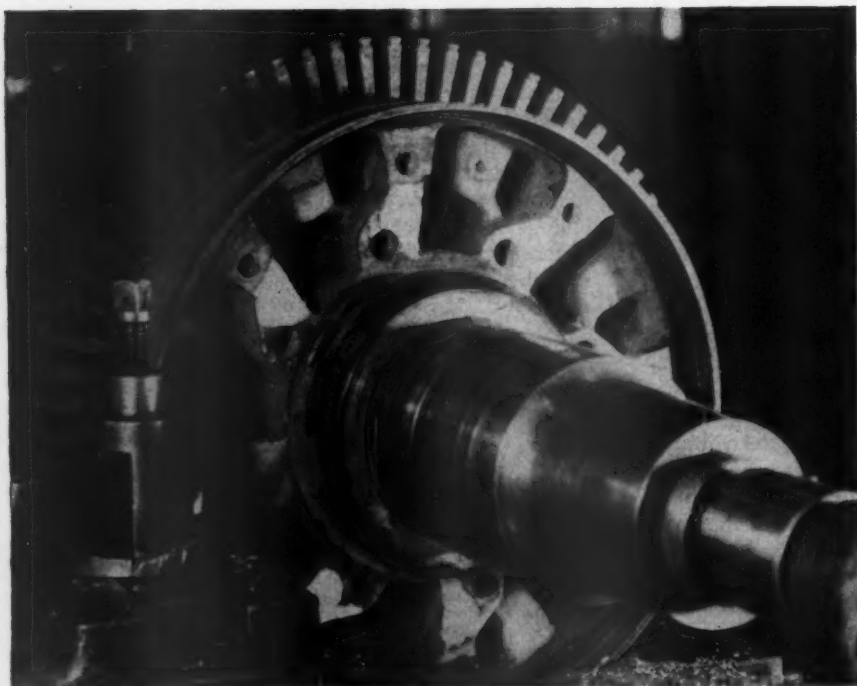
The pinion end of a D-7 traction motor with the coil-support webs welded but not machined
